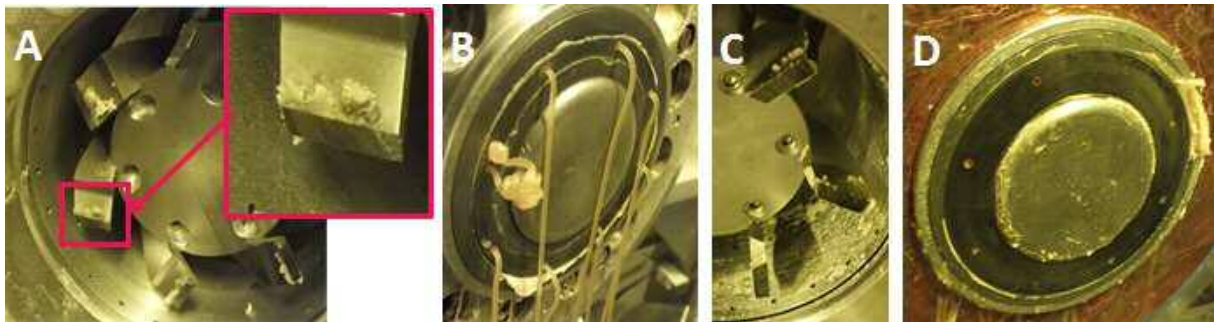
Pelletizer knife head with 45° angled knives (A) resulting in a thick melt film on the running surface (B) and knife head with 90° angled knives (C) yielding reduced melt film thickness on running surface (D).
